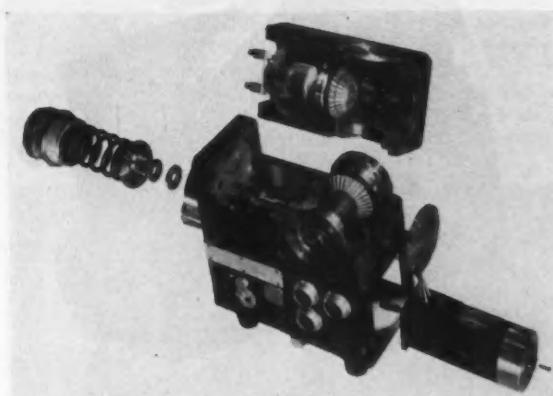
Exploded view of a standard Ferranti double-train backlash-free reduction gearbox
